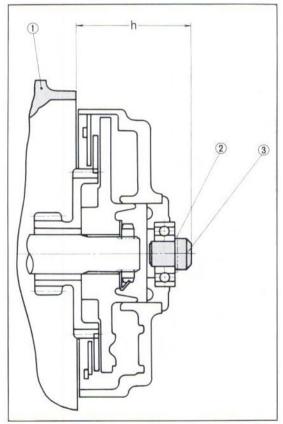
① R. crank case ③ Clutch outer cover pin ② 10 mm washer
